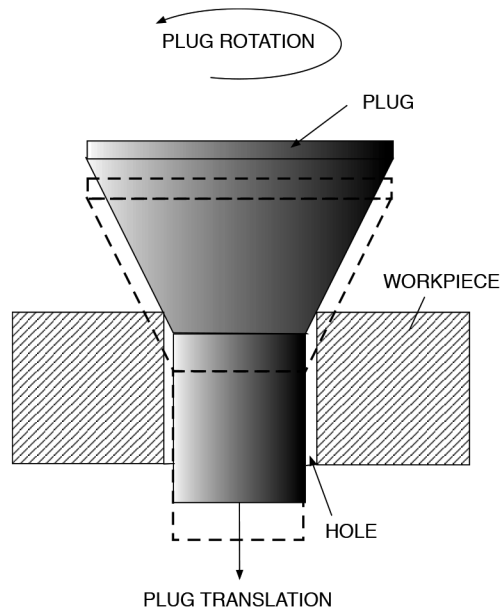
Sketch of plug weld process (a much-simplified plug is shown). Plug is rotated and pulled into hole in workpiece. Workpiece contact metal is extruded out along the contact surface.
